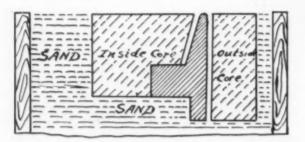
CROSS-SECTION THROUGH MOLD AND RING, SHOWING
